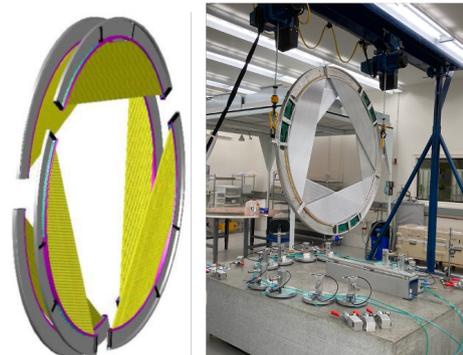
Six Panels are joined to make a Plane.] Right; Two planes are joined back-to-back after a 60° rotation to form a station.(see the description in the text)
